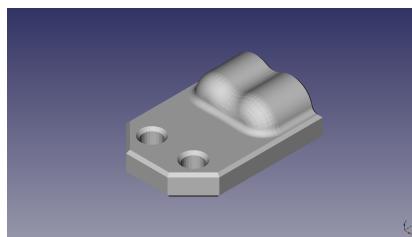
Begonia 3D Printed Cable Carrier Mount Render
